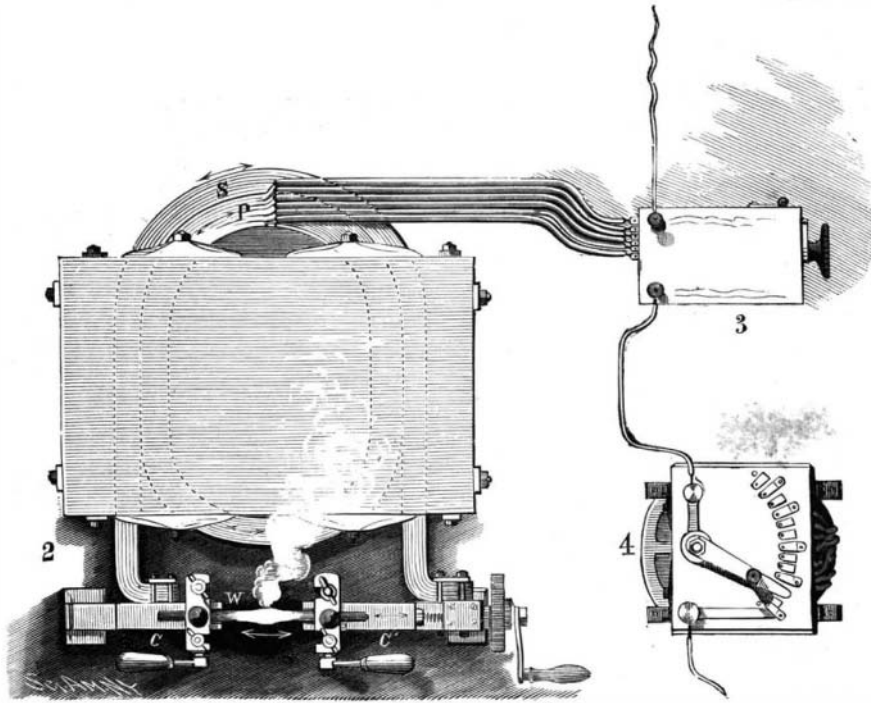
PLAN VIEW OF THE TRANSFORMER AND WELDING CLAMPS.
